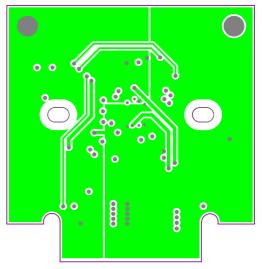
epc635 Card Edge Connector Carrier: Layout middle top and bottom
